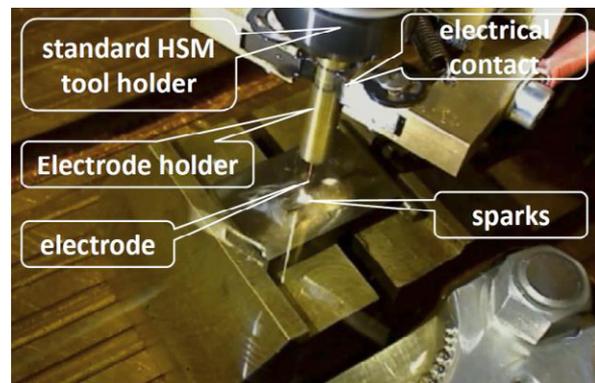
Micro EDM Milling machining – experimental electrode holder
